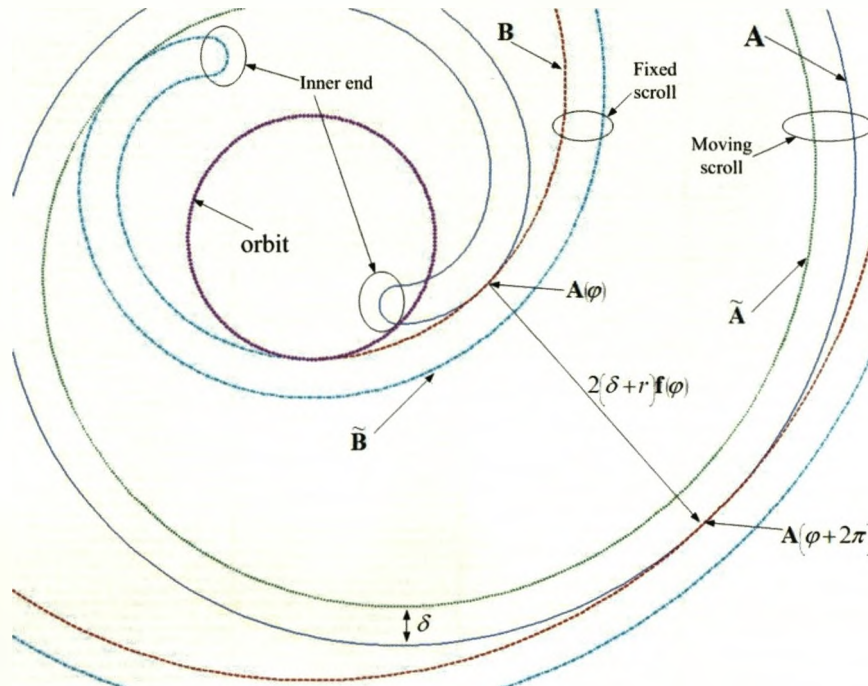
Scroll with constant wall width and wall thickness constant definition
